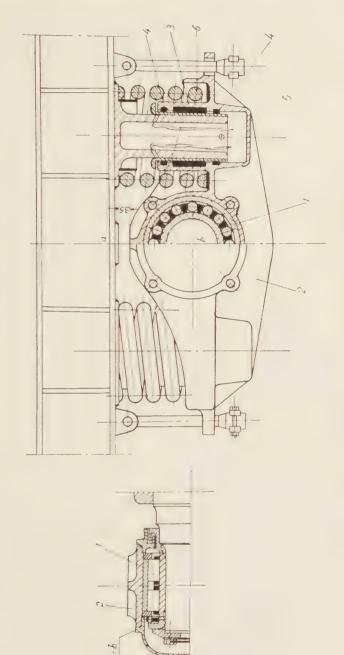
PKP roller bearing axlebox guided between two cylindrical guides.
